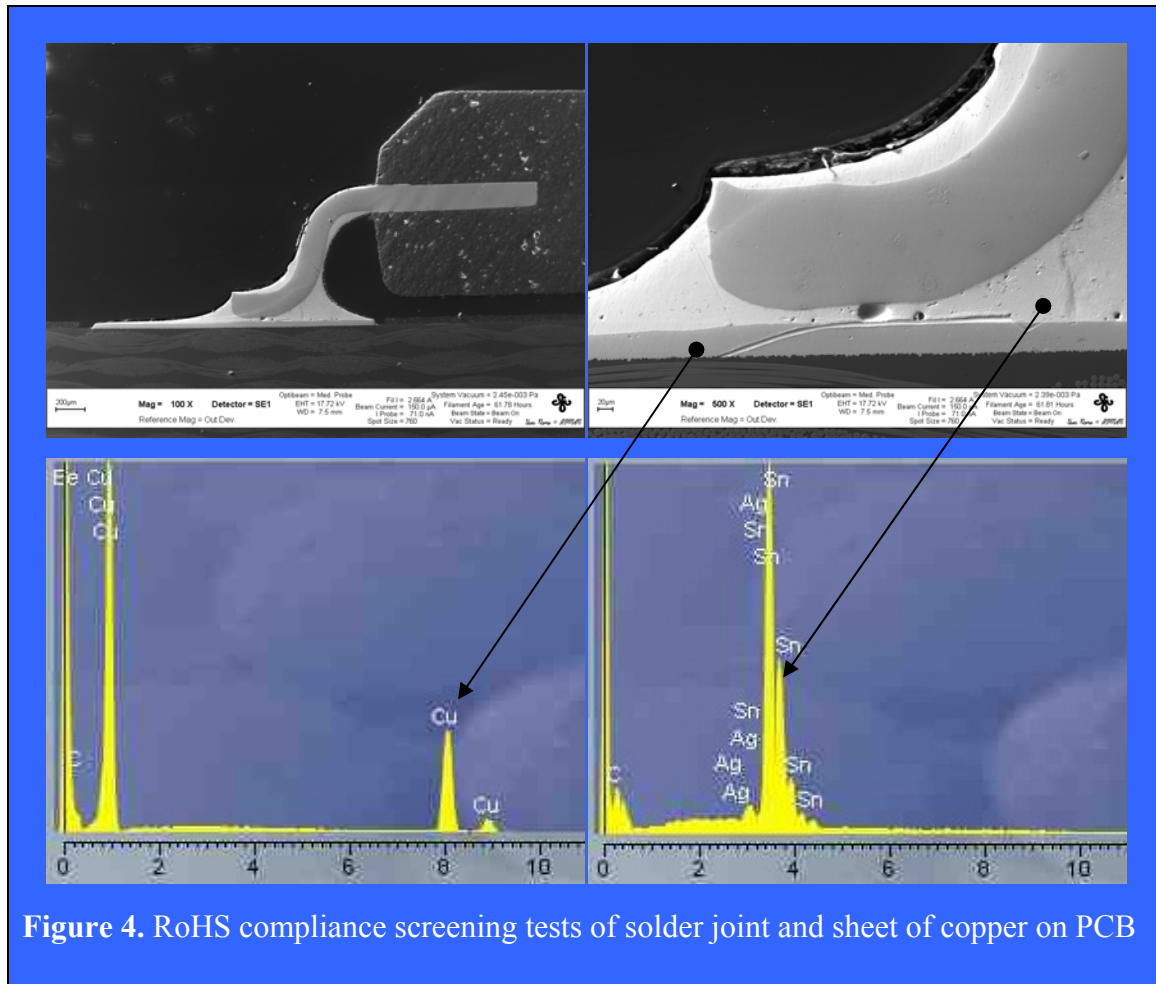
RoHS compliance screening tests of solder joint and sheet of copper on PCB
